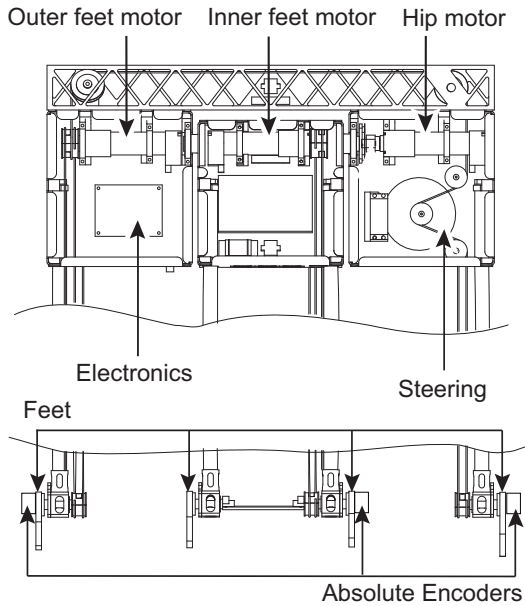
CAD-drawing of the Cornell Ranger and its most important parts
